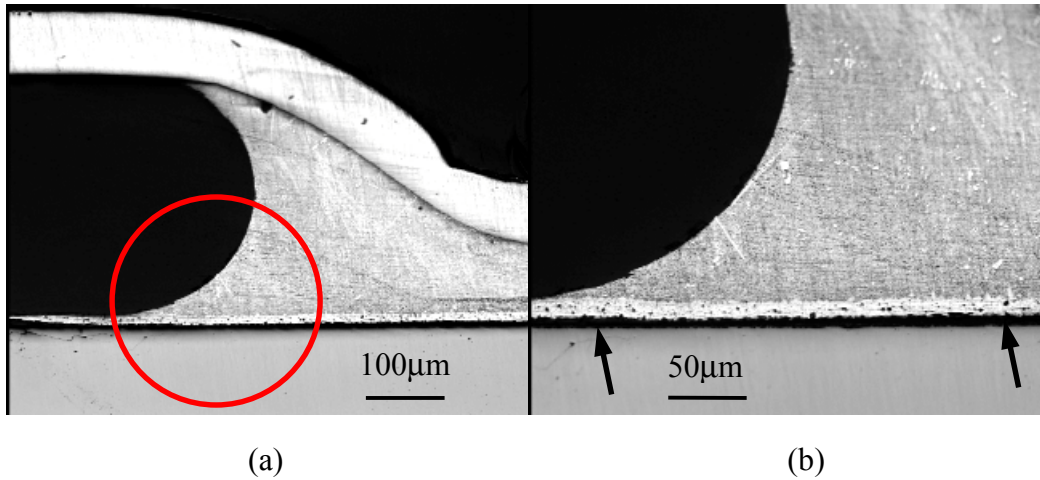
(a) An Ag3.5-Sn96.5 dimple solder joint after 345 thermal cycles; and (b) the zoomed-in view of the circled region.
